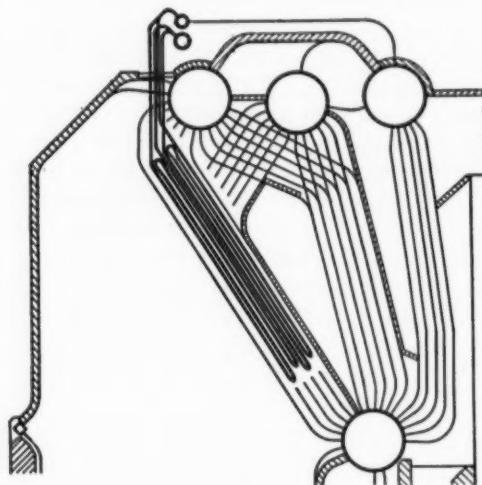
Superheater placed intertube in front bank of four-drum boiler
